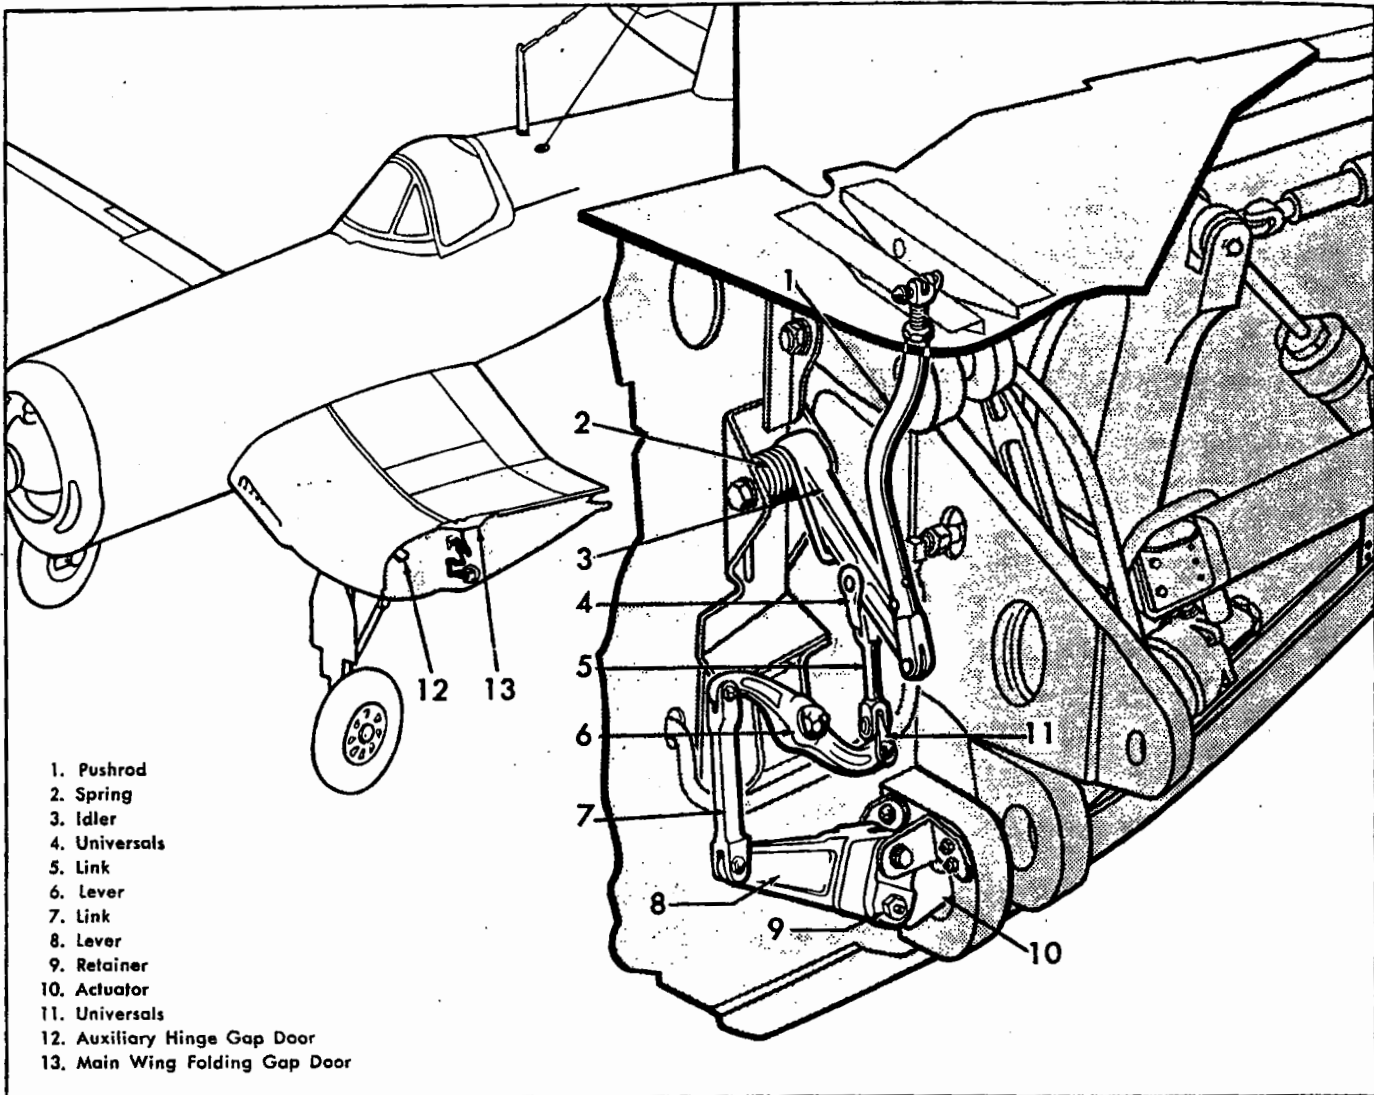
Main Wing Folding Gap Door and Mechanism.
